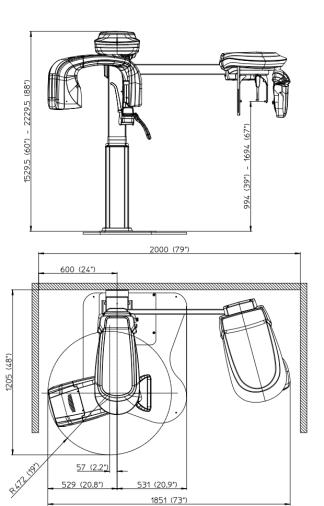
X-MIND prime 3D dimensions – Free-standing version
